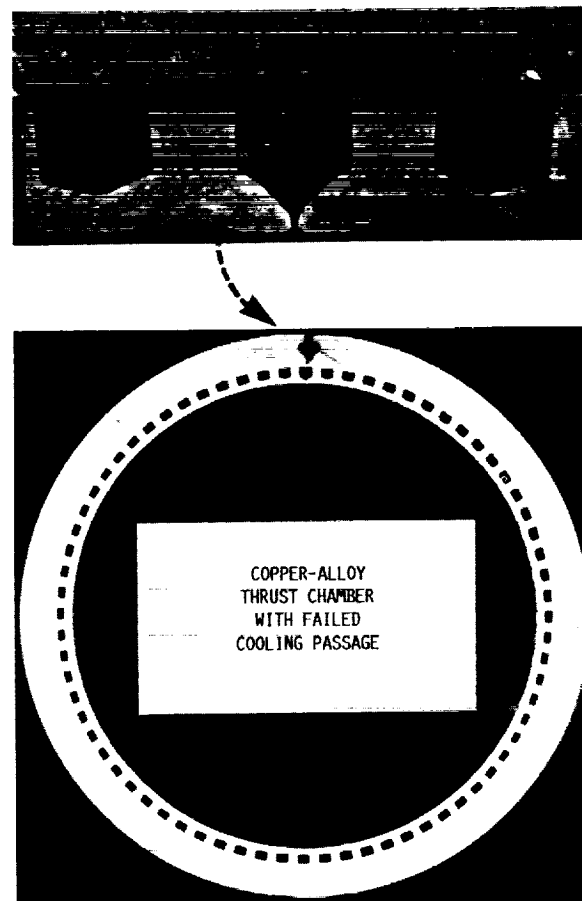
Rocket thrust chamber with enlargement of fatigue failure in cooling passage wall (ref. 23).
